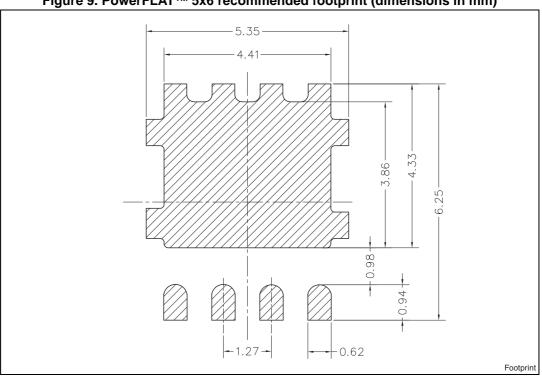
PowerFLAT™ 5x6 recommended footprint (dimensions in mm)
